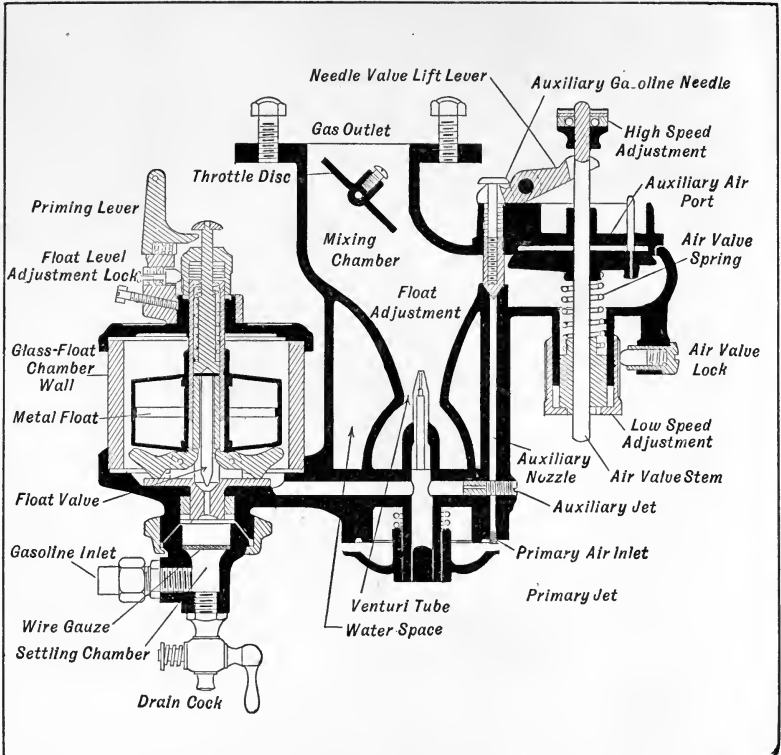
Details of Stromberg Double-Jet Carburetor, which Provides Extra Fuel Through Auxiliary Spray Jet when Motor Demands It.
